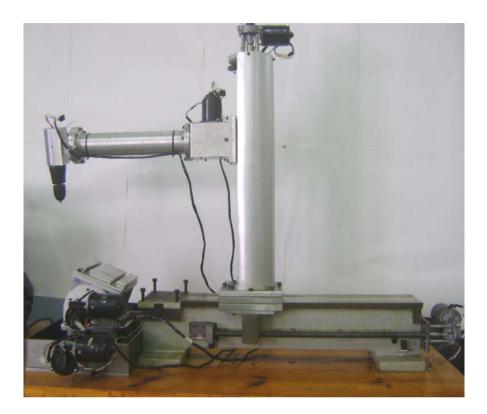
Five Axis Drilling Machine (X, Y, Z, A and B)
